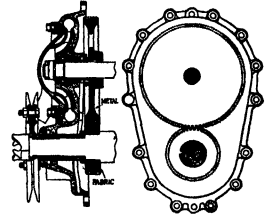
Typical fabric gear drive as used on the Oldsmobile
